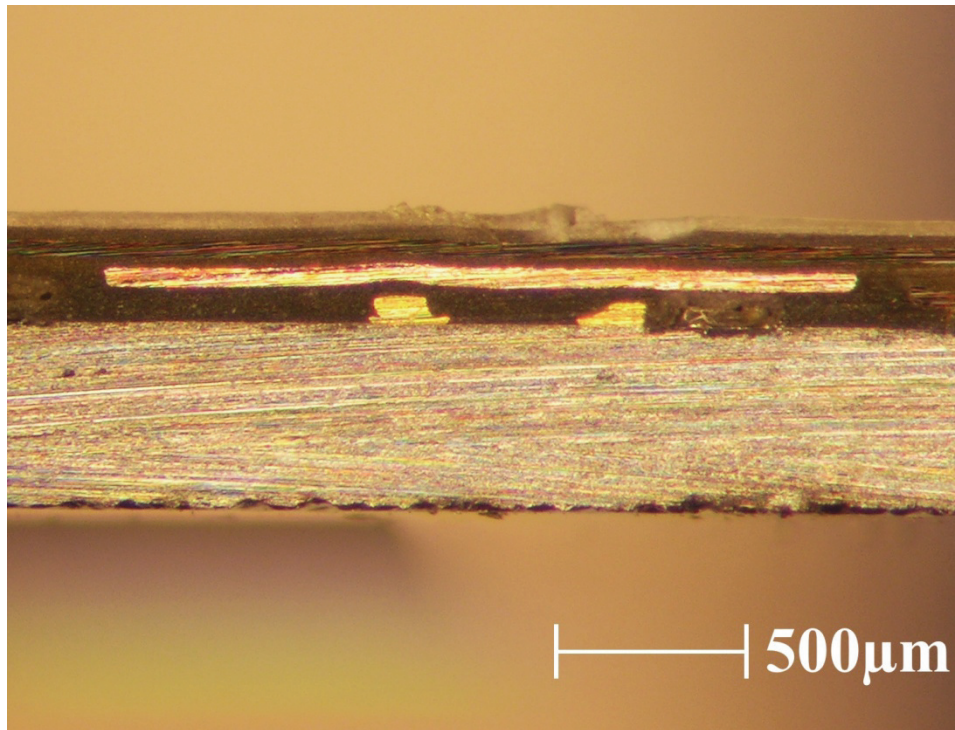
A cross-sectional view of a flip-chip bond between an FPCB and a sensor chip created using coined gold stud bumps and an underfill adhesive. The gaps between the stud bumps and the FPCB contact pad were caused by a lack of planarity during the flip-chip process.
